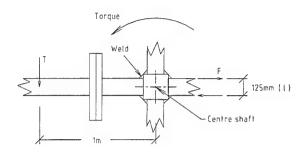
Inertia load on hub block welds (plan view)
